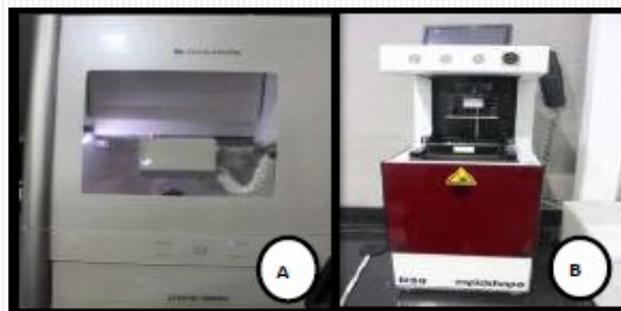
(A):DWX shape milling machine, (B): Rapidshape D30 printer
